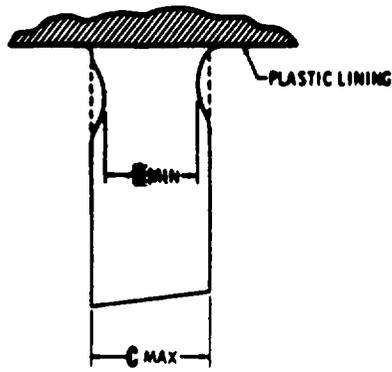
Compressor Blade Damage Caused by Rub
